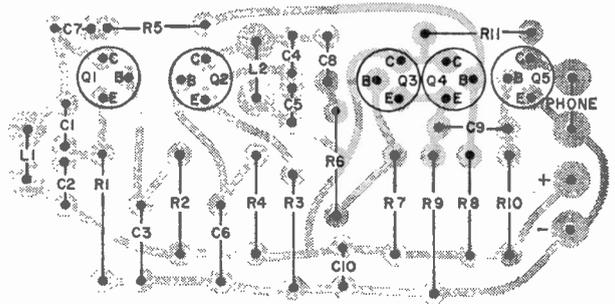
Actual-size foil pattern to be used in making the PC board.
